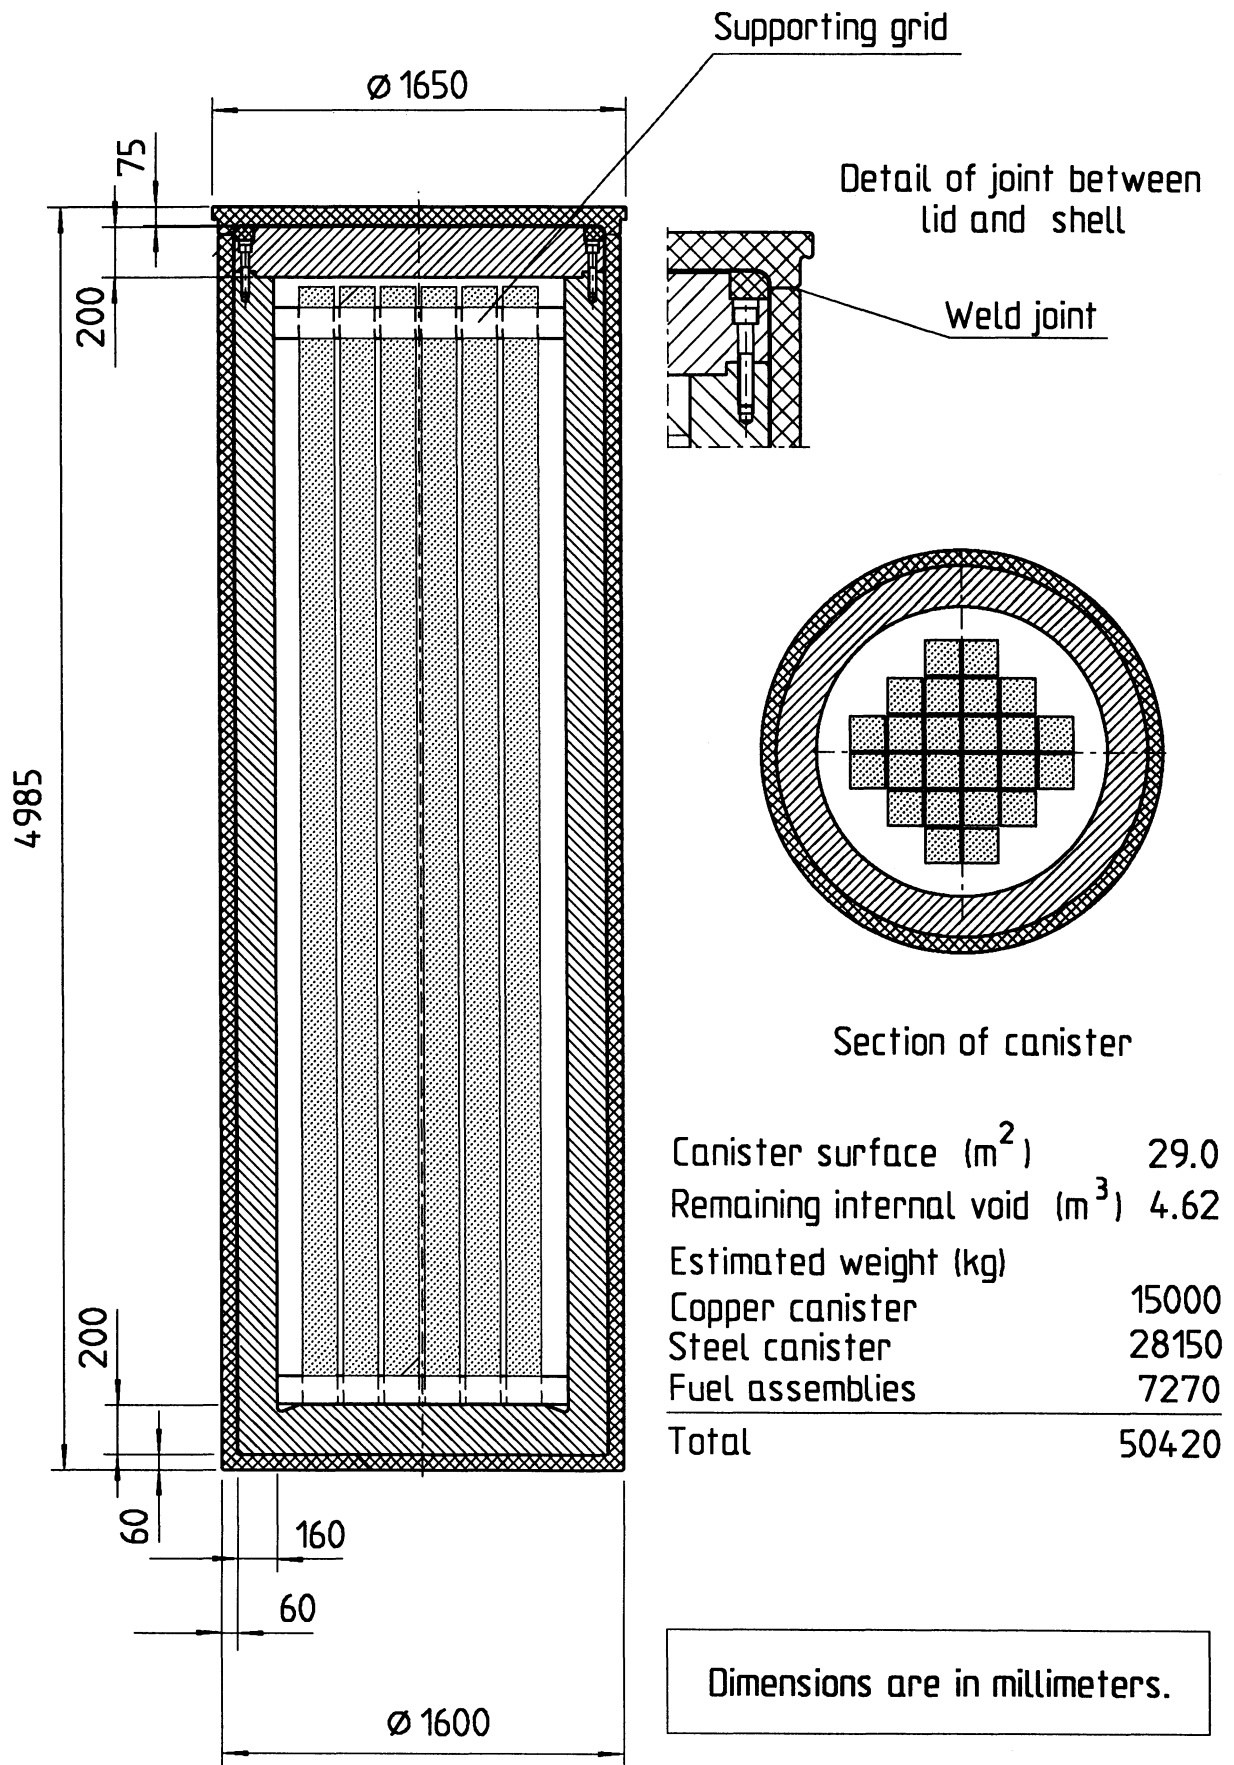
Copper/steel canister with flat ends, BWR assemblies.
